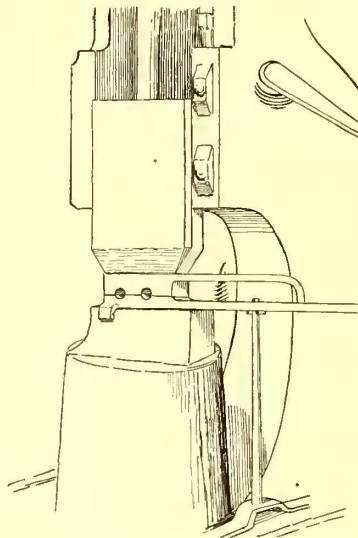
SPRING SWEDGE AND STEAM HAMMER.
